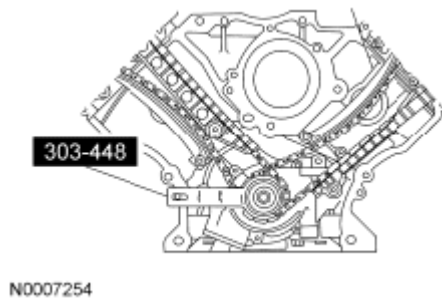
Positioning Crankshaft Using Crankshaft Holding Tool
